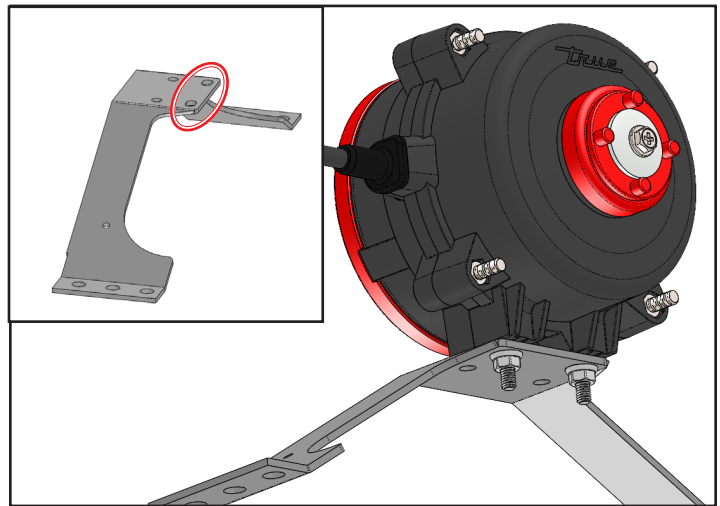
Replacement fan motor installed on an A-bracket. Use the front mounting holes (circled).
